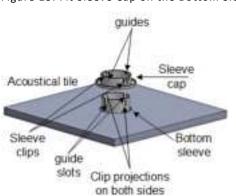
Fit Sleeve Cap on the Bottom Sleeve
